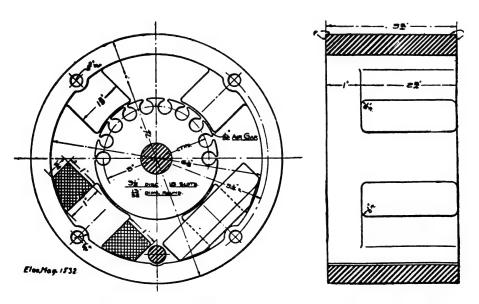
END ELEVATION OF FIELD FRAME AND ARMATURE CORE.
